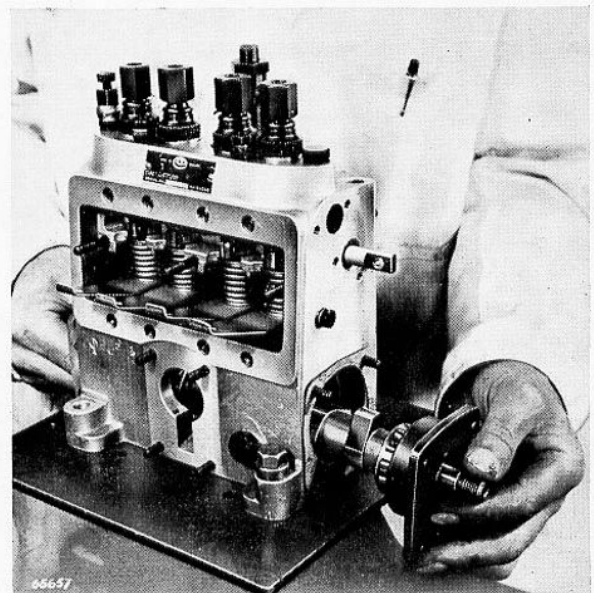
REMOVING CAMSHAFT—TYPICAL ILLUSTRATION
